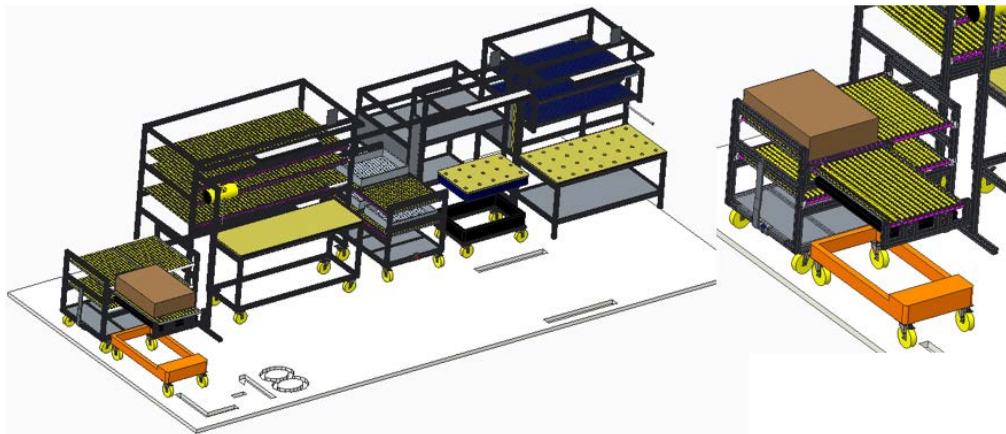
Transferring a packaged Integrus cabinet form the trolley to the finished product car
